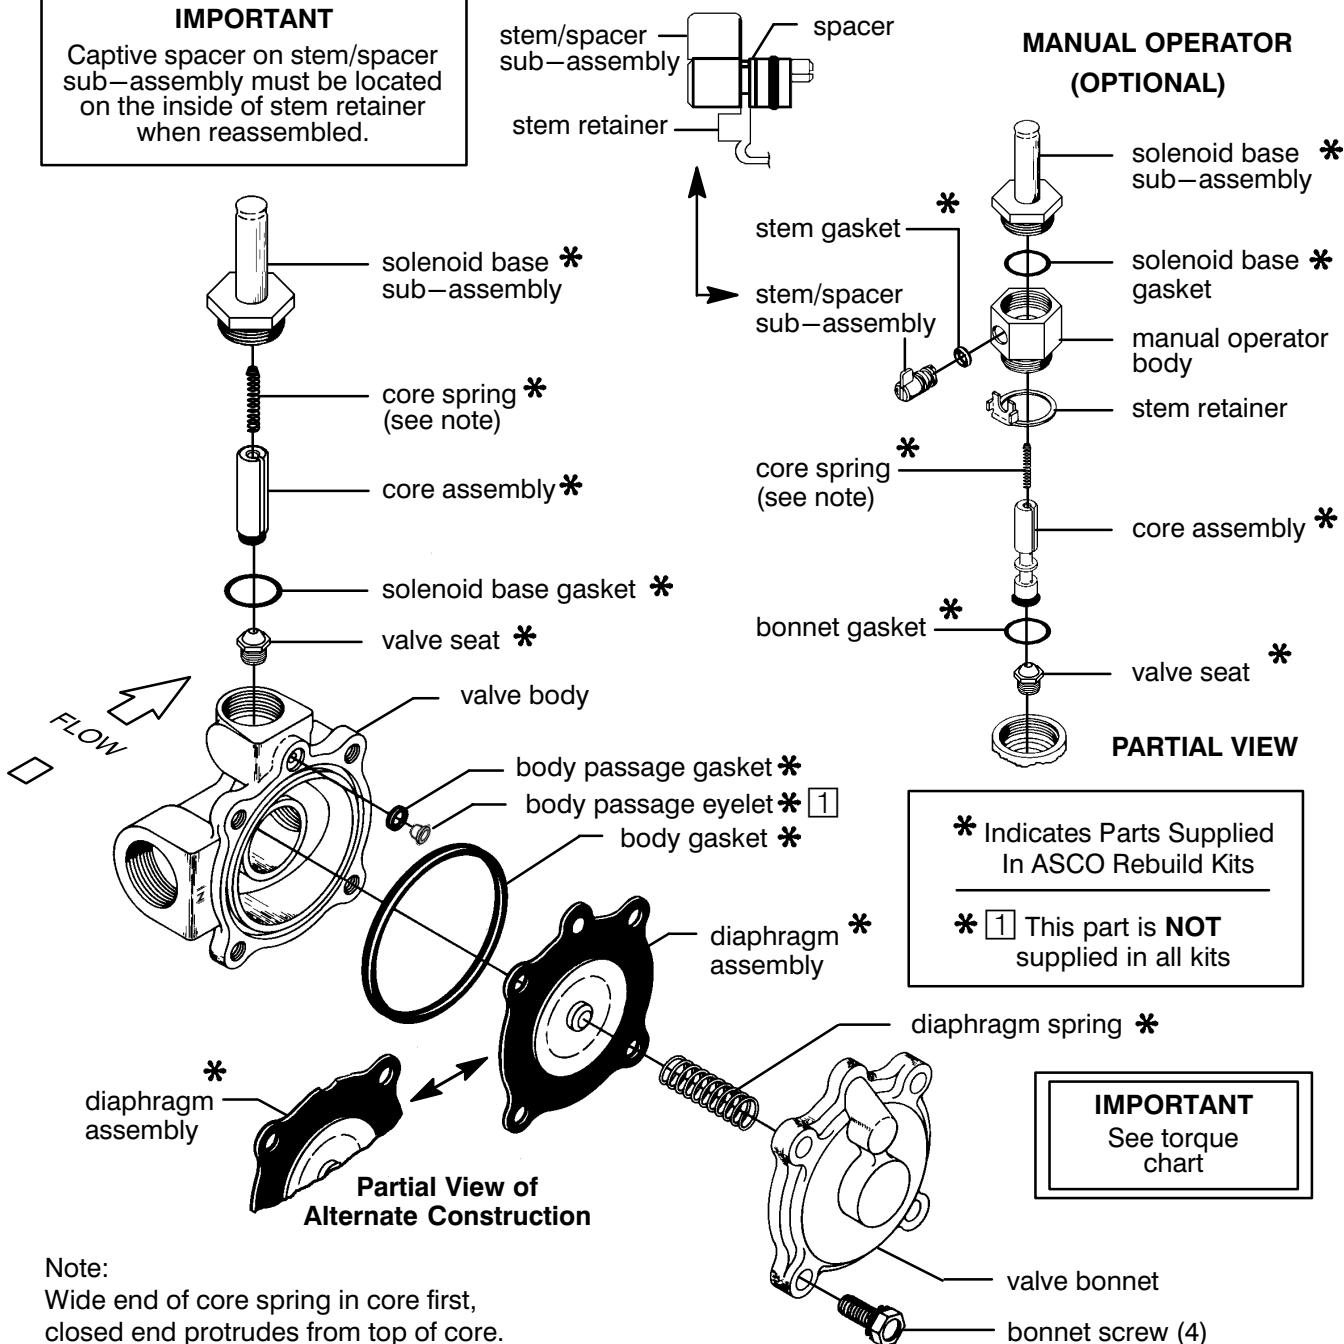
Series 8210 valve without solenoid, AC construction with 1" or 1 1/4" NPT valve body shown.
